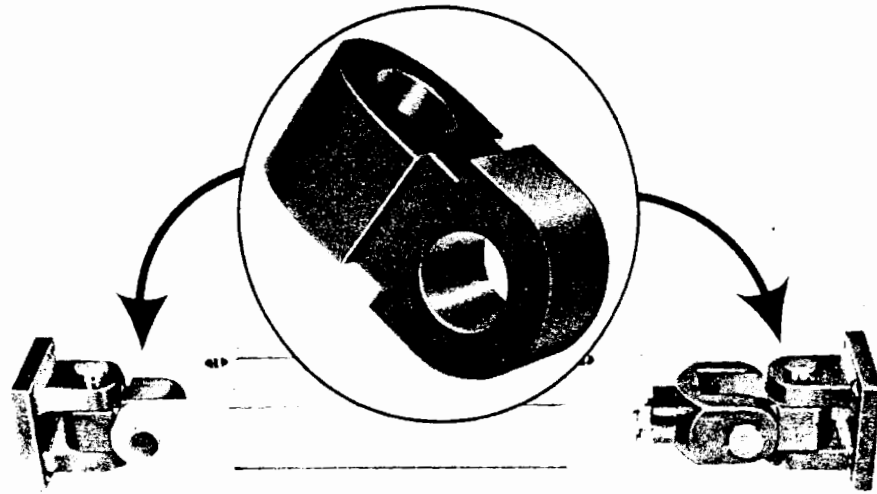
Universal alignment mounting accessory for fluid cylinders.
